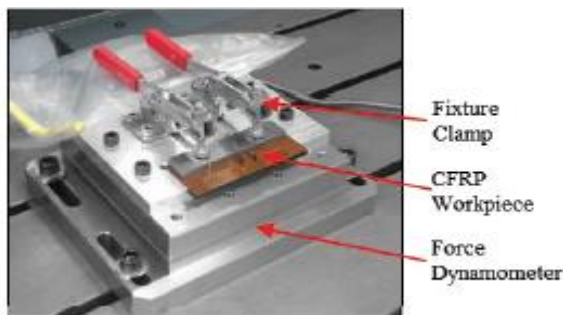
Machine test setup schematic for UD-CFRP orthogonal machining
